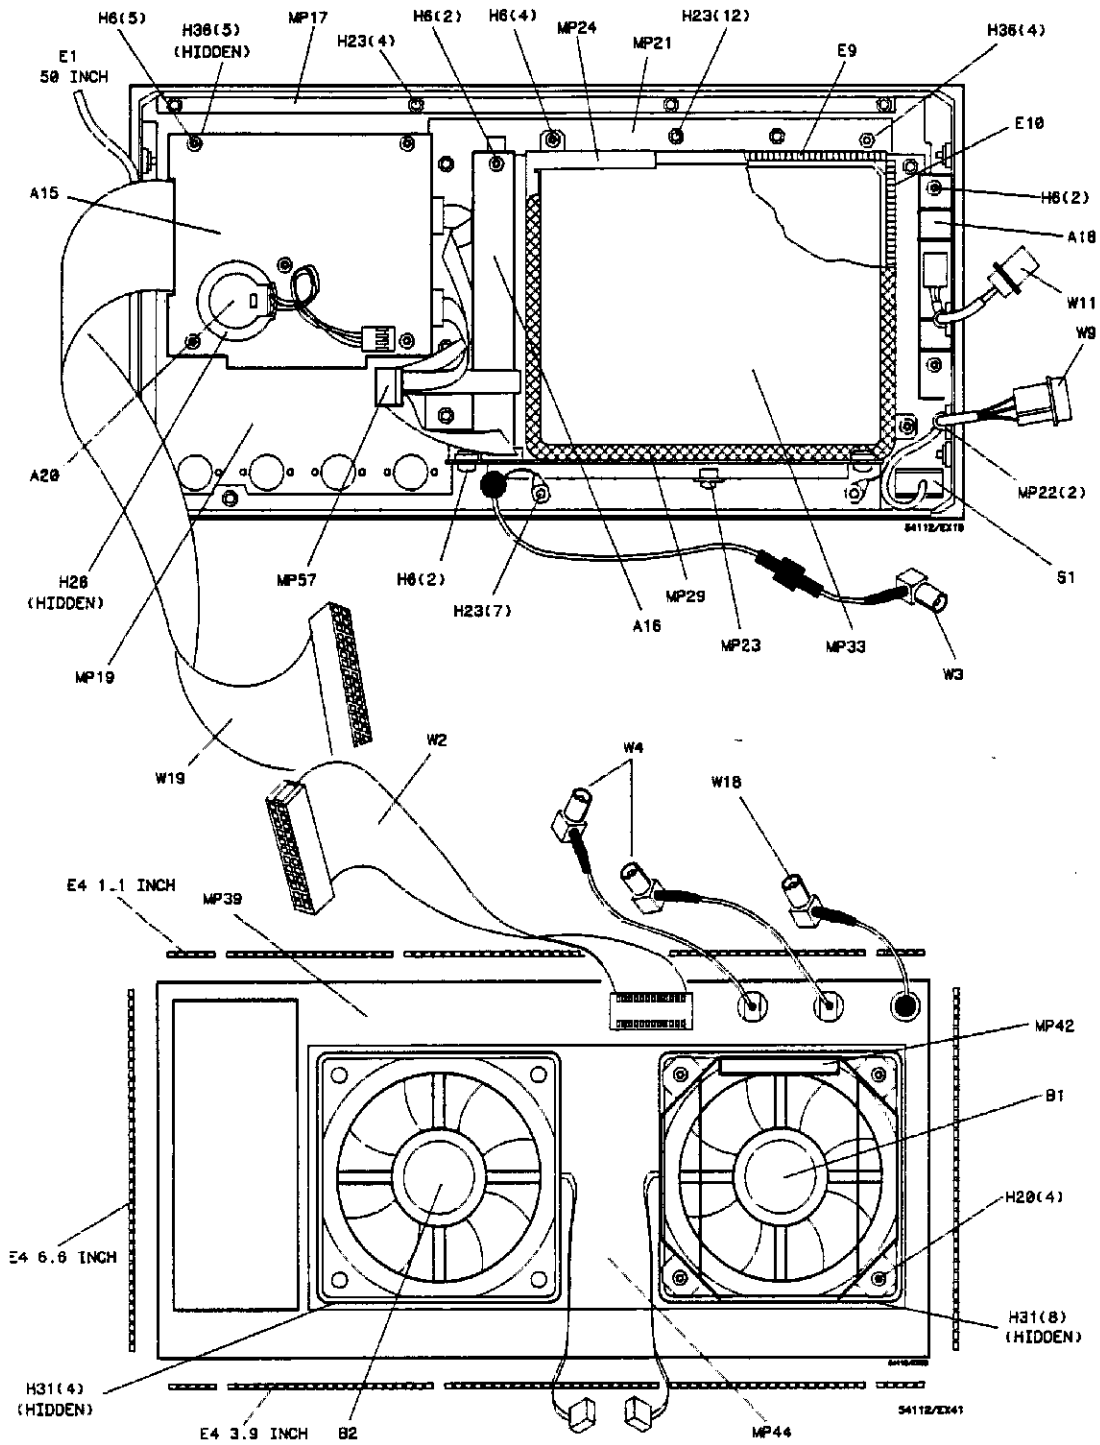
Mainframe Parts Locations (sheet 5 of 7)
